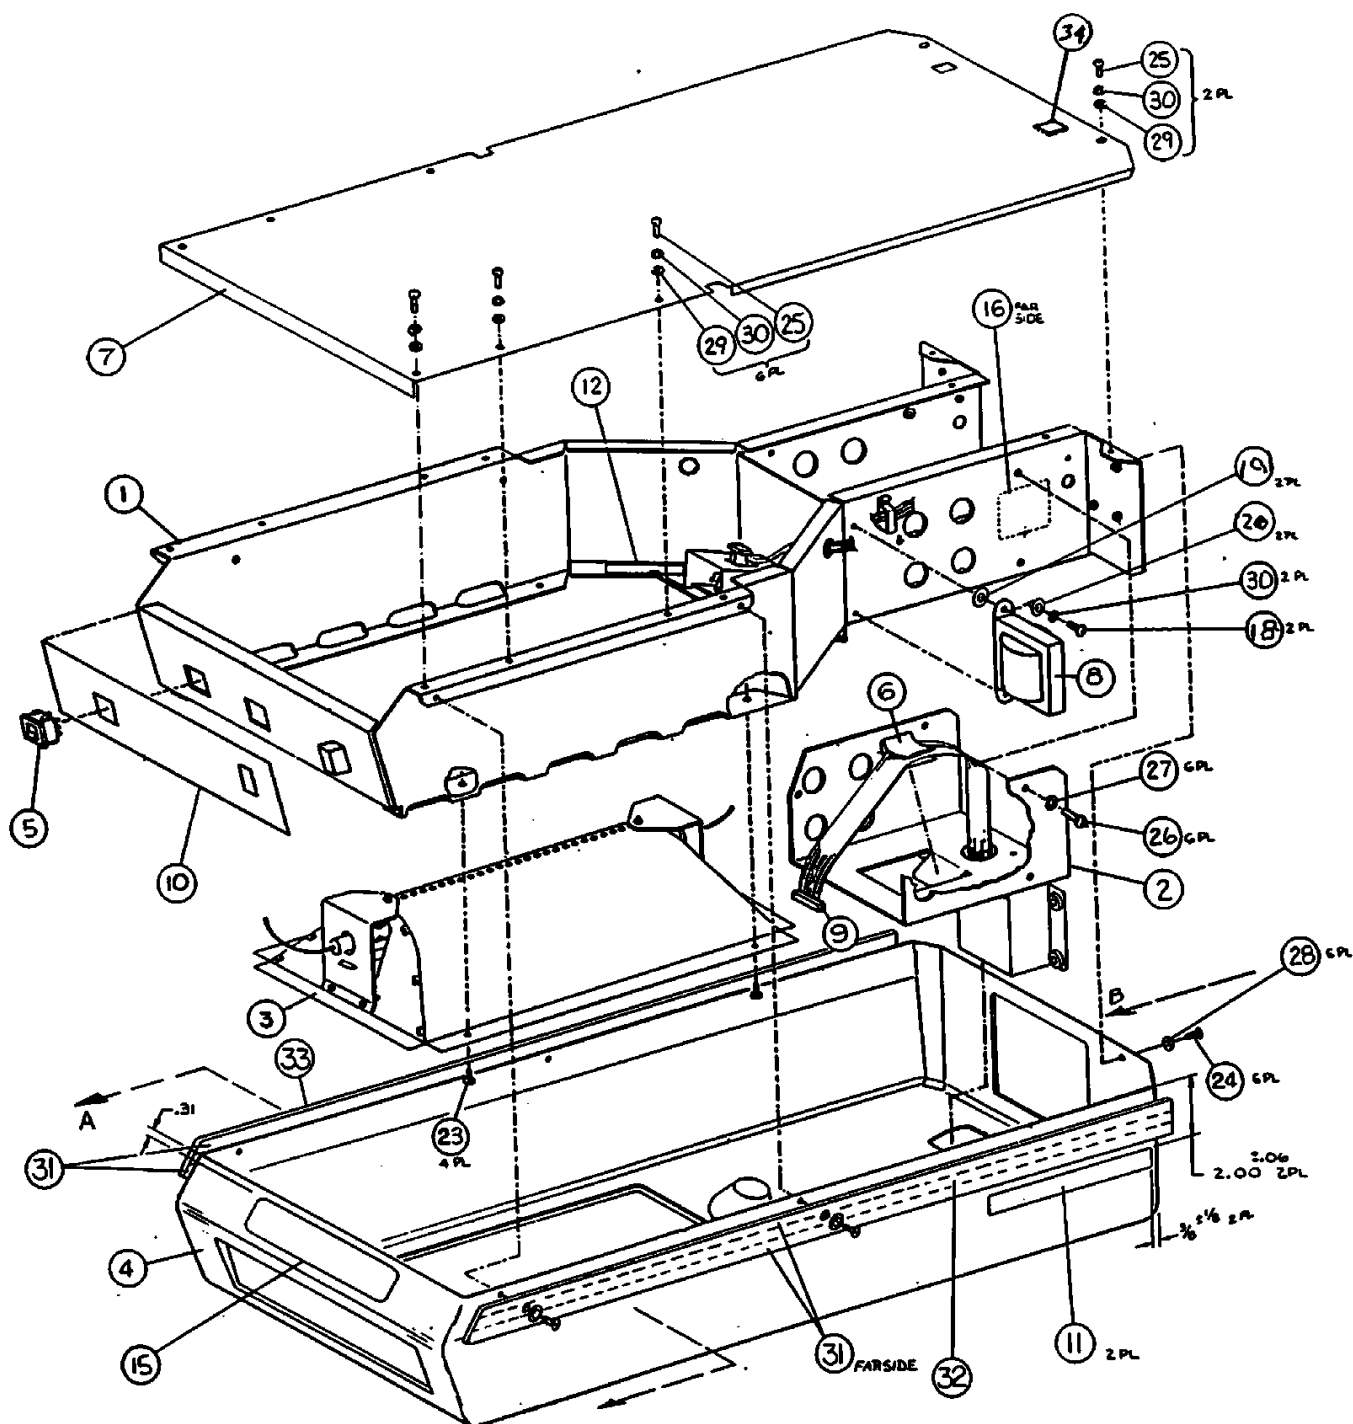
WARMER MODULE ASSEMBLY, PARTS LOCATION DIAGRAM
